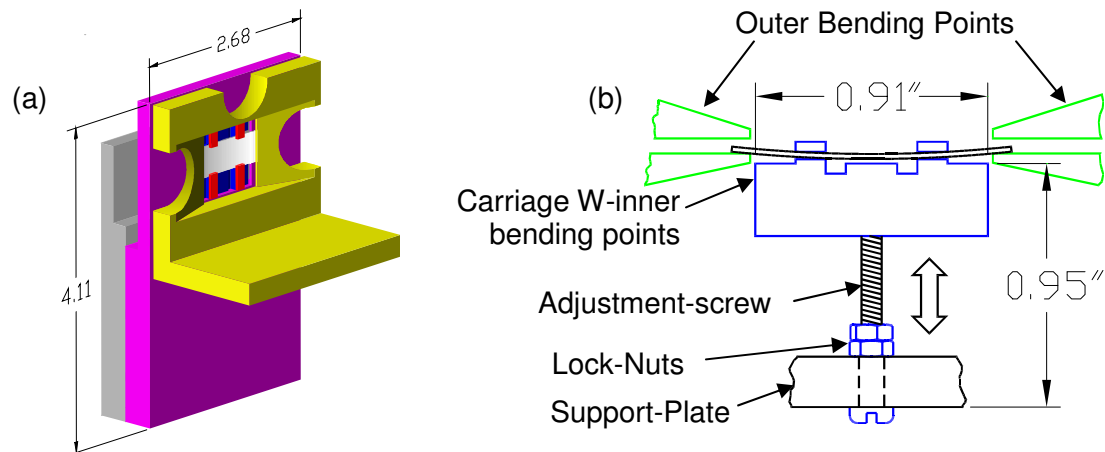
(a) 4-Point Bending Fixture. (b) Description of Parts.
